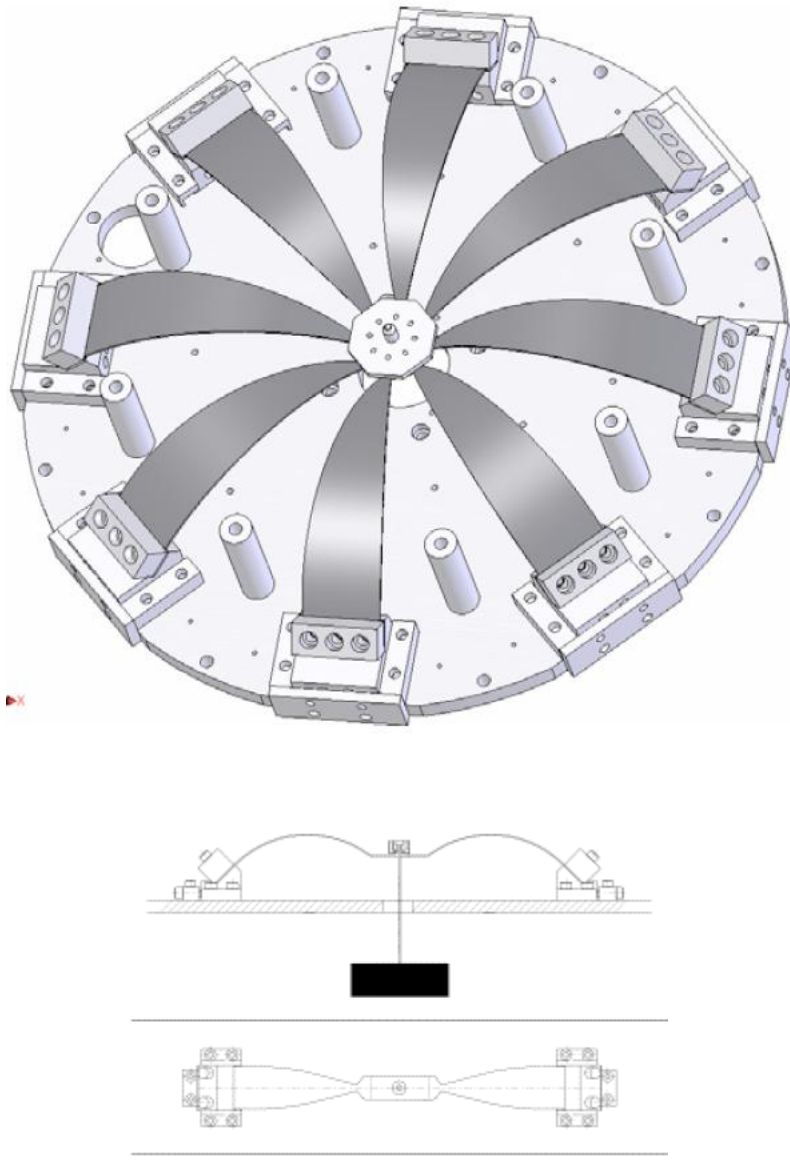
GAS filter, plant and side view. In this case we have 8 steel blades, but the working principle is the same.
